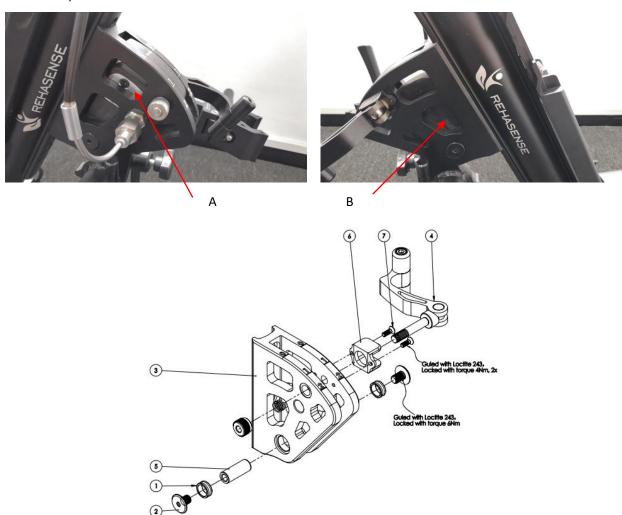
Exploded drawing of manual lifting mechanism – EBA200
